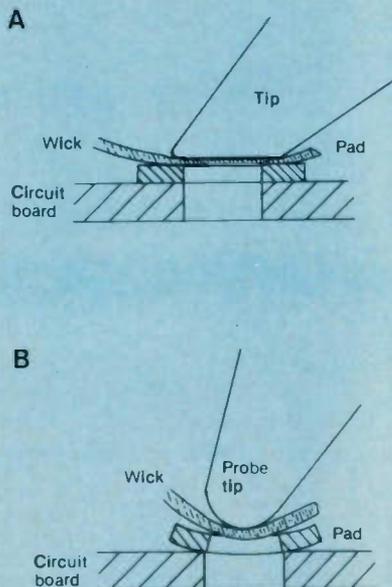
(A) Heavy pressure with a tip mashes wick flush on pad, which causes too rapid heating of the pad. (B) Pressing down too hard with a probe or pointed tip can also crumple the pad, tending to drive it into the hole.
